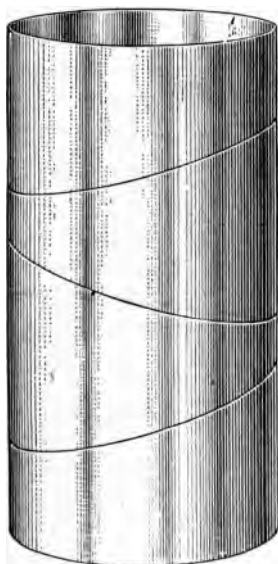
Illustrating an adjustable square elbow with sections so revolved as to form a piece of straight pipe.
